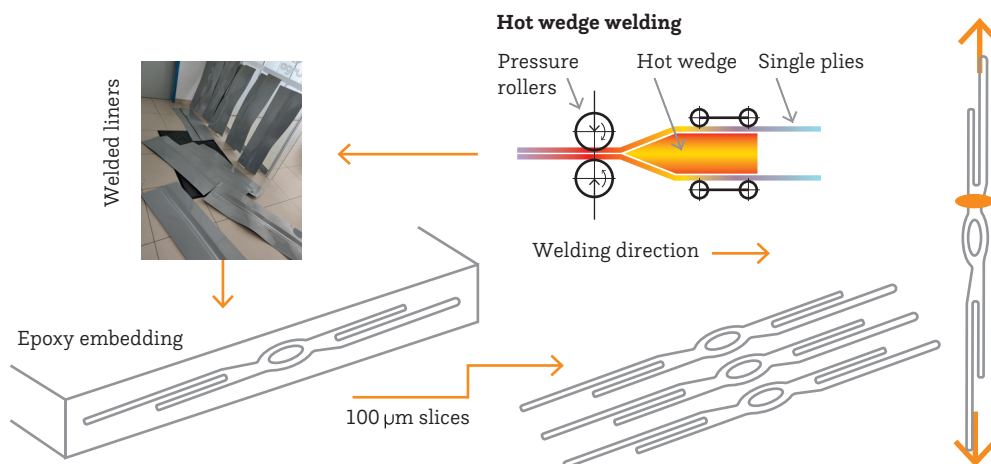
Method for hot wedge welding of PP liners and preparation of micro-specimen for ageing testing.
